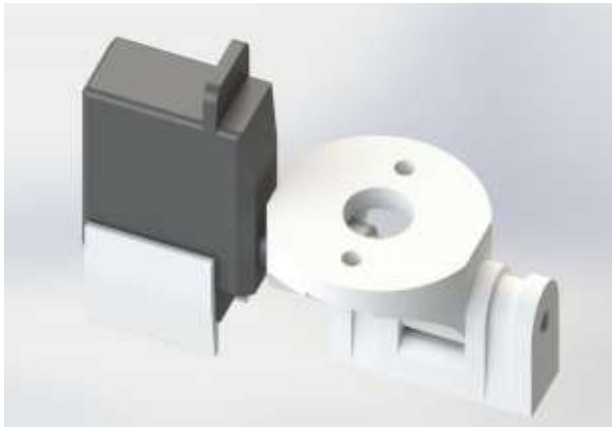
Tilt mechanism to rotate motor designed in Solidworks
